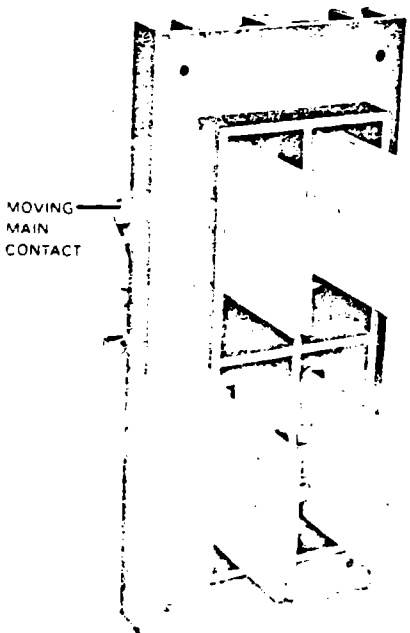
Type DS-840 Pole Unit Assembly—Rear View
